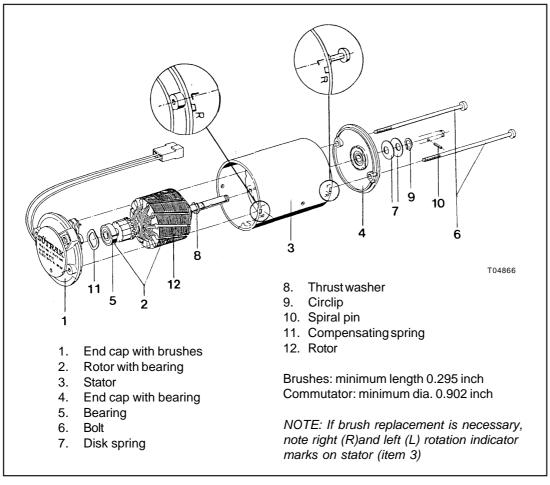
Exploded view of Longlife blower motor (24 VDC-motor, left-handed counterclockwise rotation)
